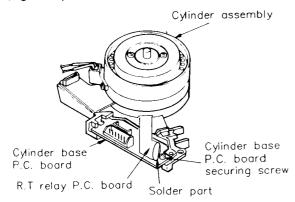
Relay P.C. board and cylinder base P.C. board
